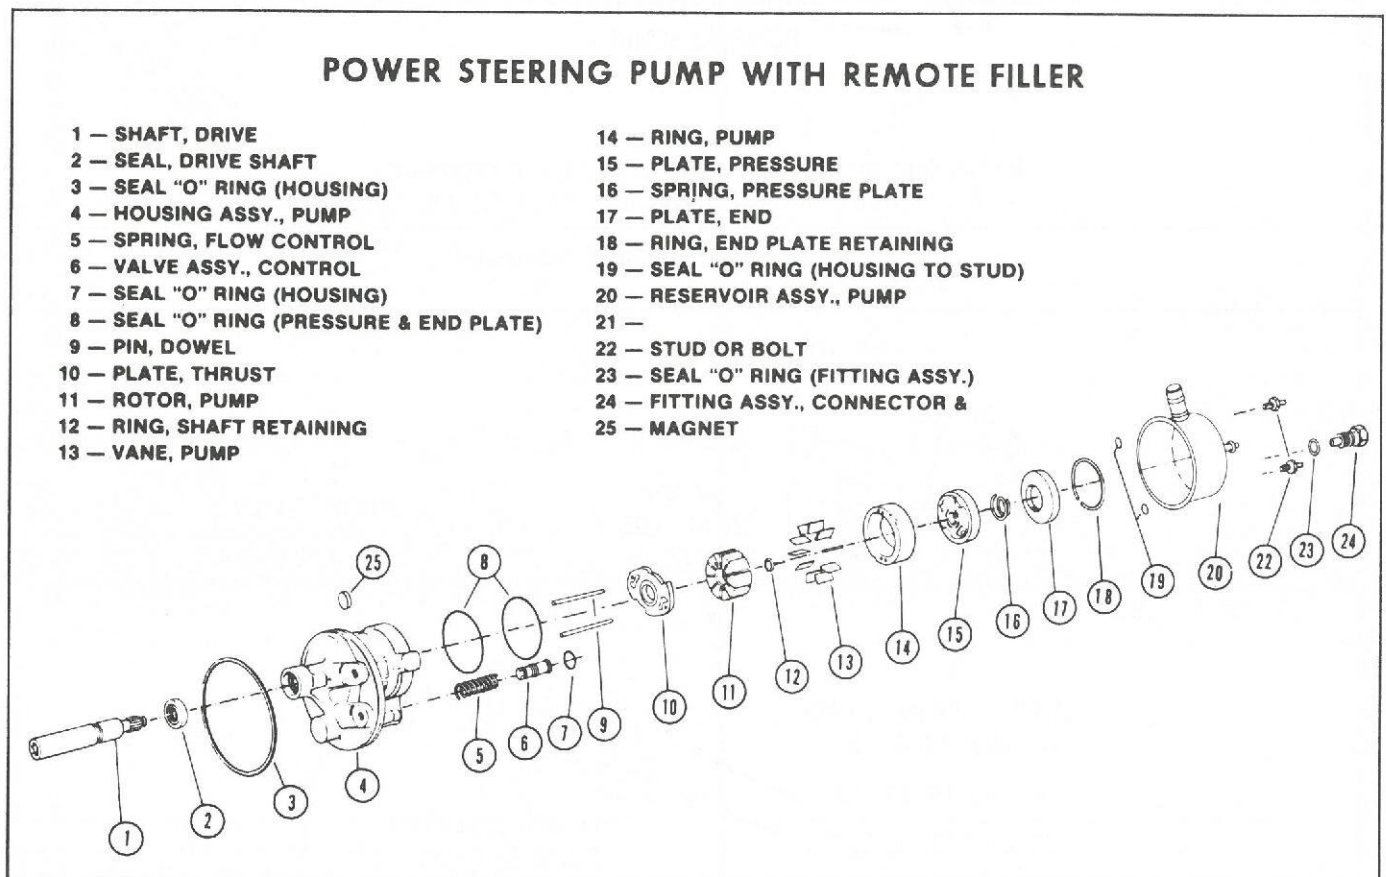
Power Steering Pump with Remote Filler - Toronado
